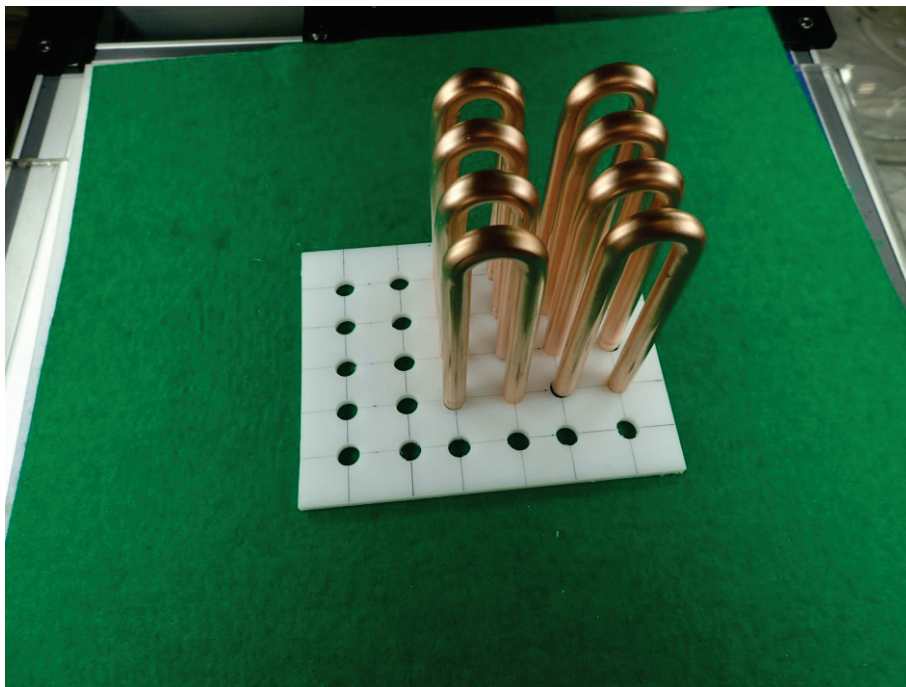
Picture of test piece layout for stress corrosion cracking.
